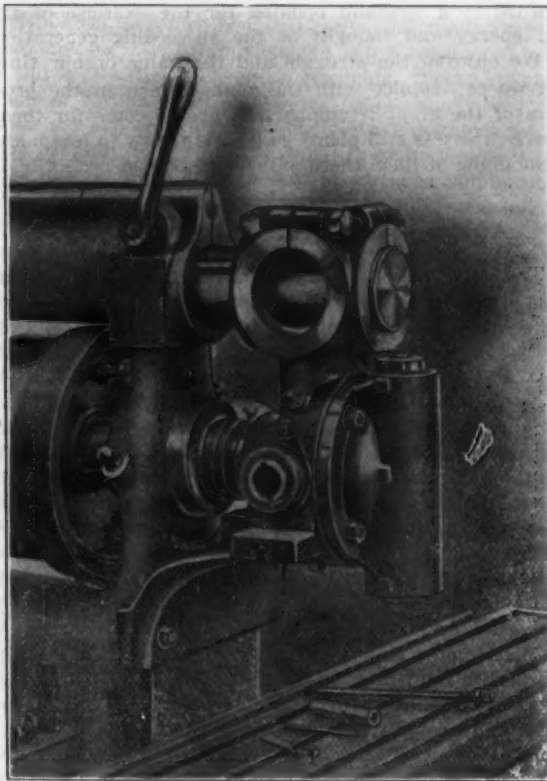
Showing Attachment in Position for Setting Spindle at Any Angle in Plane Parallel to Face of Column.
